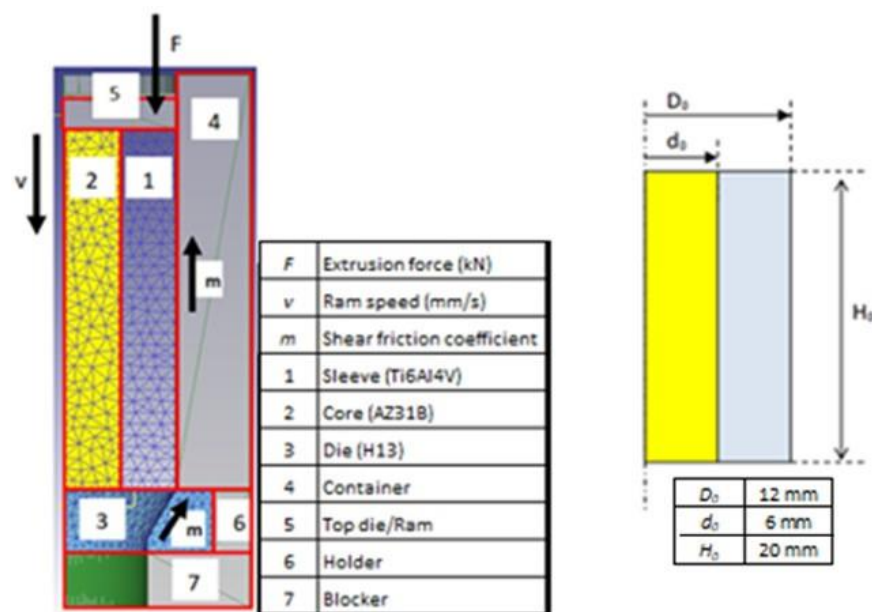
Bimetallic co-extrusion set up and initial billet dimensions.
